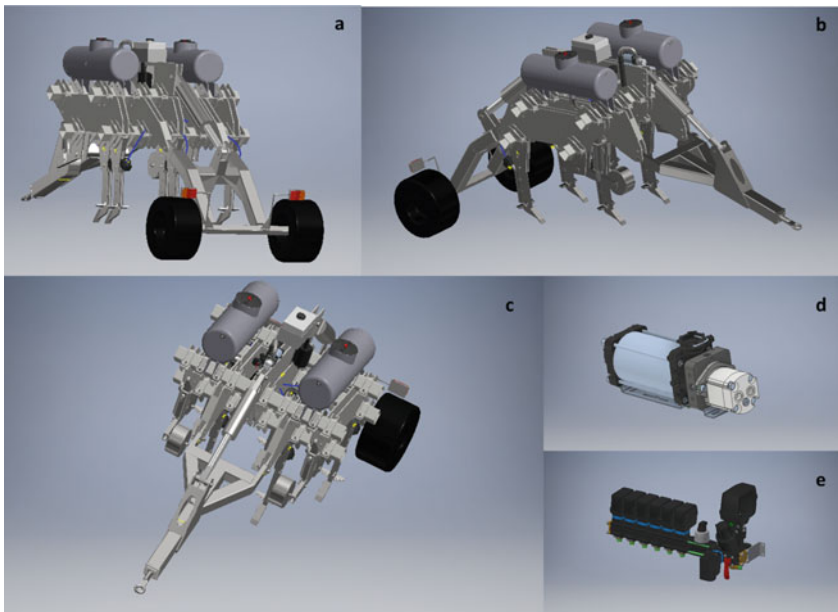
Non-quoted project of the machine and details. Rear left view (a), right anterior view (b), top view (c), pump (d), valve group (e)
